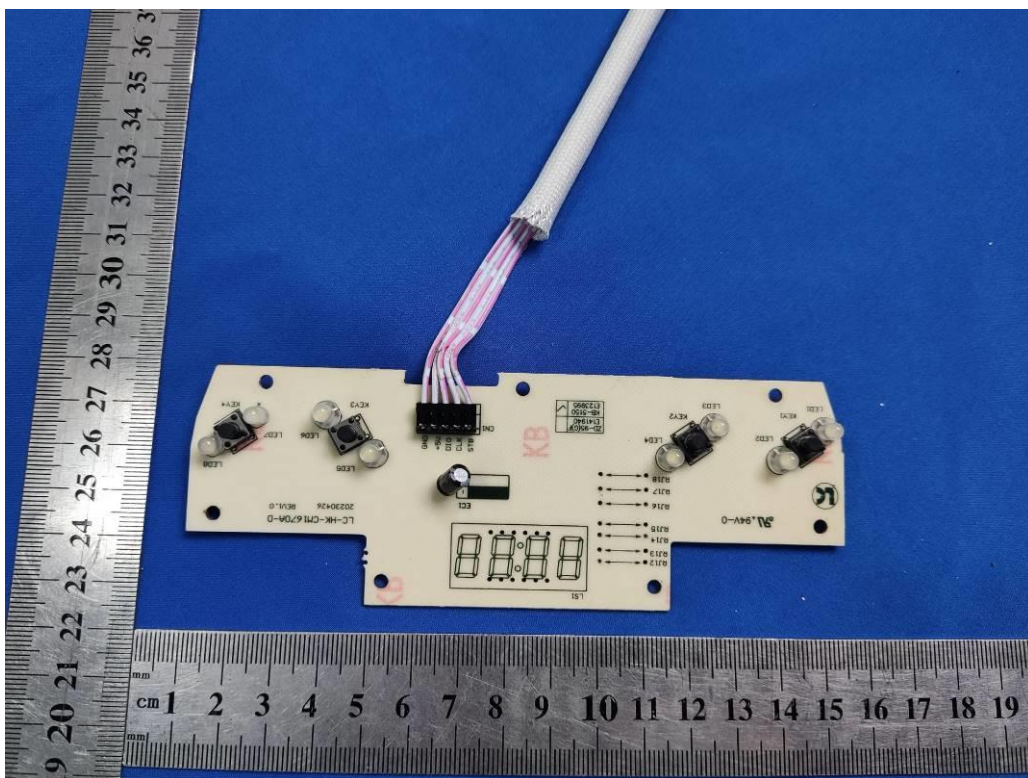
Control PCB view (4700 GENSE, CM1670A)
